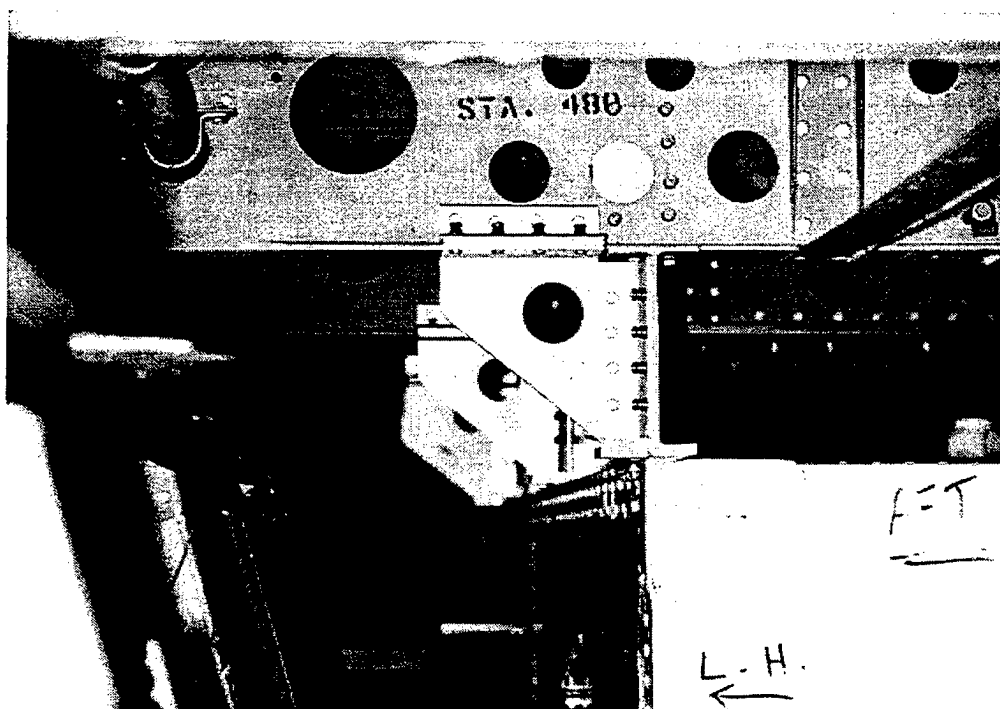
PRETEST AUXILIARY FUEL TANK LEFT ATTACHMENT FRAMEWORK
